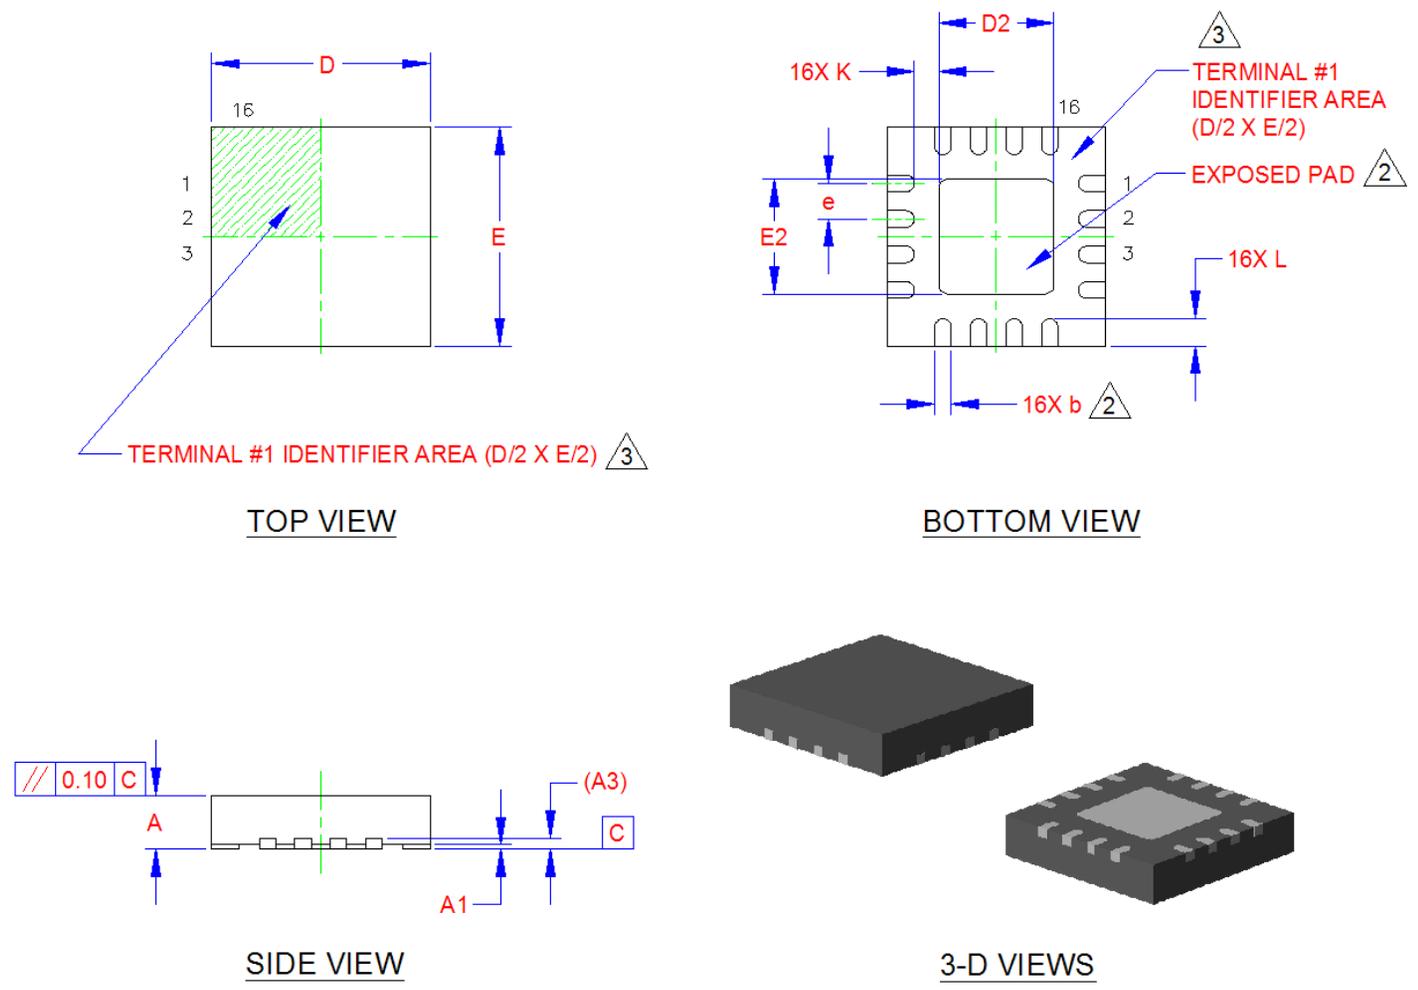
16-Pin QFN 4mm x 4mm Package Drawing
